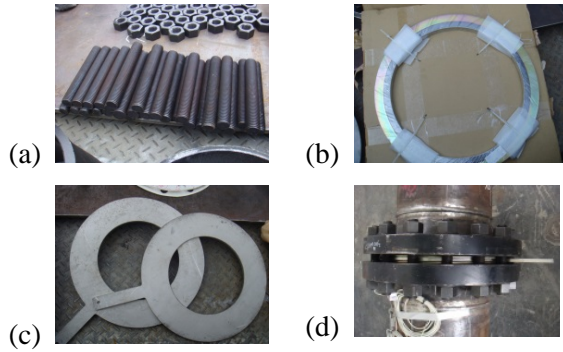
Components of the tested flanged joint: (a) stud bolts and nuts, (b) gasket, (c) pressure breakdown orifices, and (d) flanged joint.
